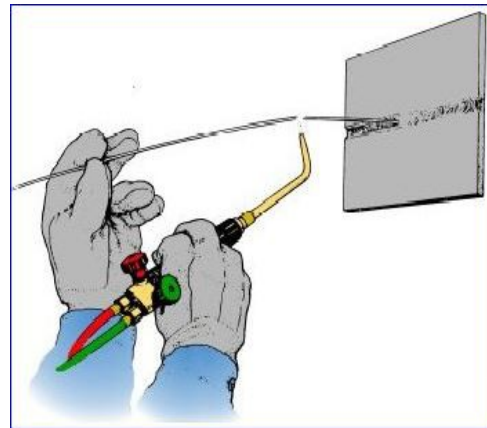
Here's a good trick to learn. When your rod gets too short for comfortable manipulation, let it freeze in the puddle. Bring a fresh length up against the free end, and weld it to the short piece. Then reform the puddle, melting the rod free in the process of doing so, and continue your work. This works especially well in the horizontal position, as illustrated in this sketch, because in horizontal welding it is seldom necessary to put a bend in the rod in order to work comfortably, since both flame and rod are angled upward somewhat. However, you can do this in any position, first welding on the new piece of rod, then removing the bend in the original section and adding a bend in the new section.
